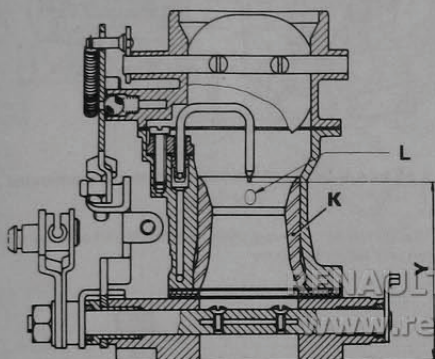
Accelerator pump delivery tube setting – Zenith carburettor (Sec 17)
